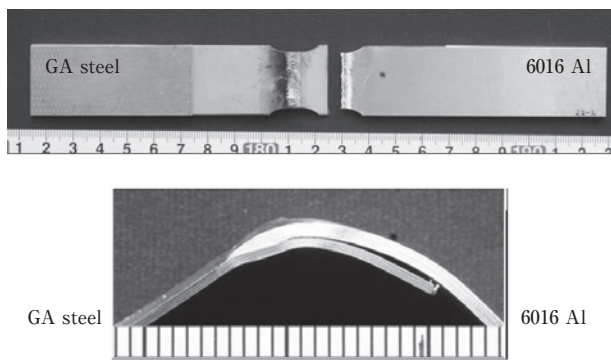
MIG welding between aluminum alloy and galvanized steel sheets.
